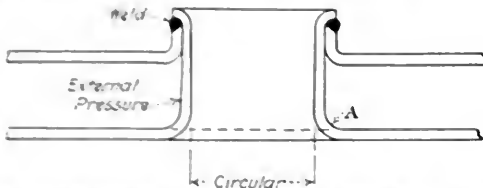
CONSTRUCTION OF FURNACE DOOR OPENING WITH OUTWARDLY PROJECTING EDGES FLANGED AND AUTOGENOUSLY WELDED
